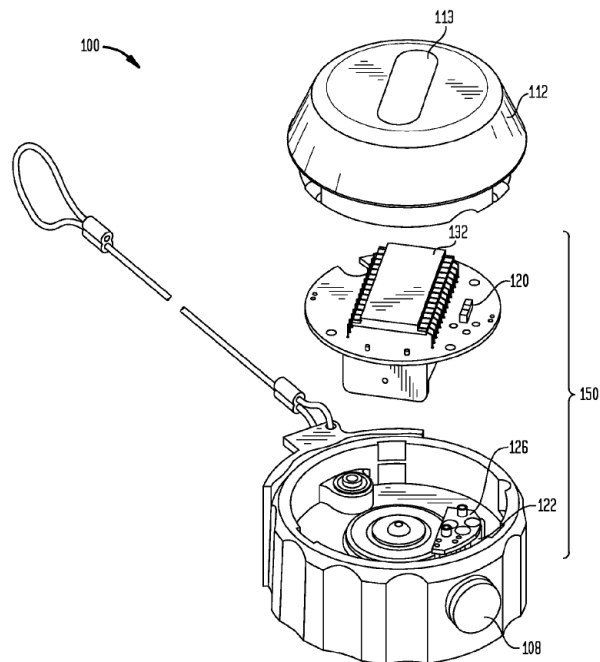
depicts valve assembly 100 and actuator 114, a rotatable knob or handle, for opening and closing valve 107 that is connected between gas source 50 and control module 200. Figure 3 illustrates an exploded view of actuator 114. As best observed in Figure 3 above, the valve assembly includes circuit 150 disposed in actuator 114. *Id.* at 5:64–66. The circuit communicates with the control module, for example via a wired or wireless link, by valve transceiver 120. *Id.* at 5:64–6:6.
